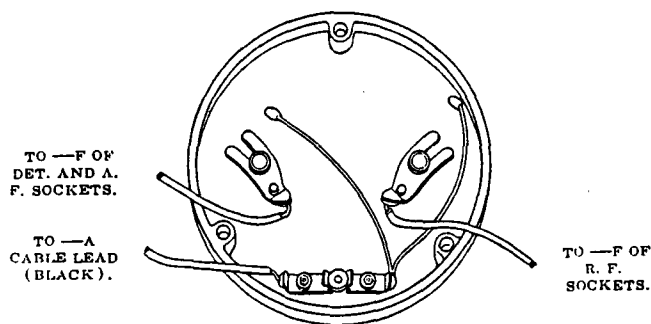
REAR VIEW OF DOUBLE RHEOSTAT AND FILAMENT SWITCH ASSEMBLY USED IN MODELS 20 (No. 4640-7570), 19 AND 21.
